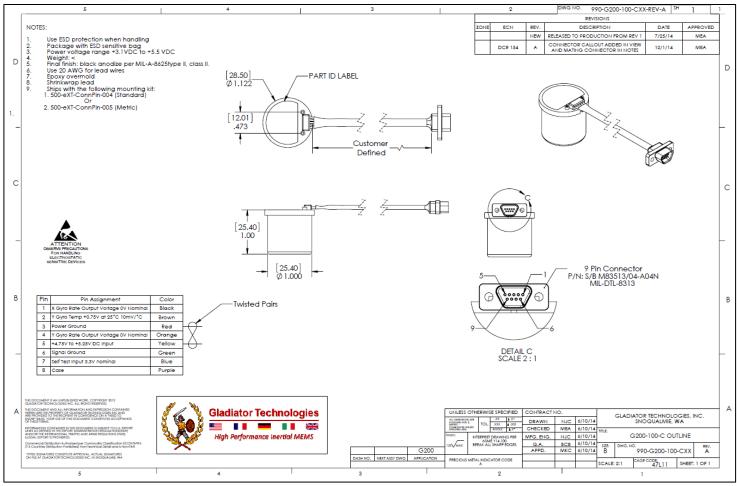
Standard Pigtail with Connector Options for G200 Outline Drawing
